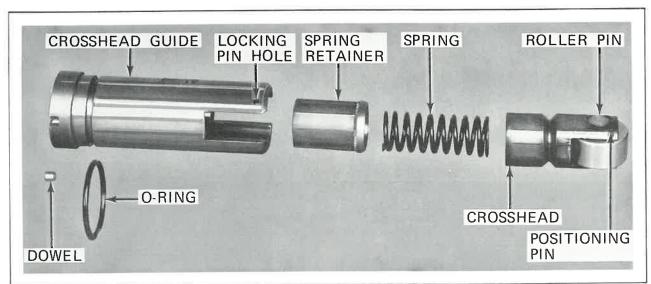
SPRING-LOADED FUEL CROSSHEAD AND GUIDE ASSEMBLY.
